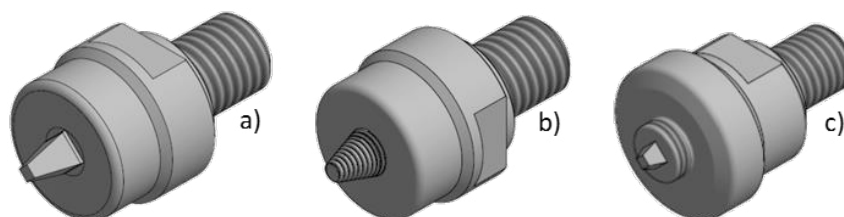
Tool geometries tested: a) Pyramidal pin; b) Tapered and threaded pin; c) Progressive pin.
